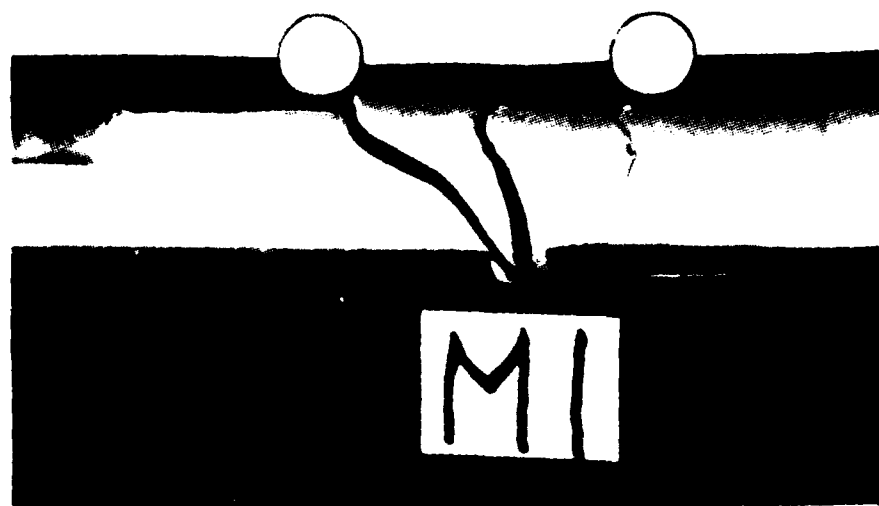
Mullite Bend Specimen M1 Multiple Fracture
